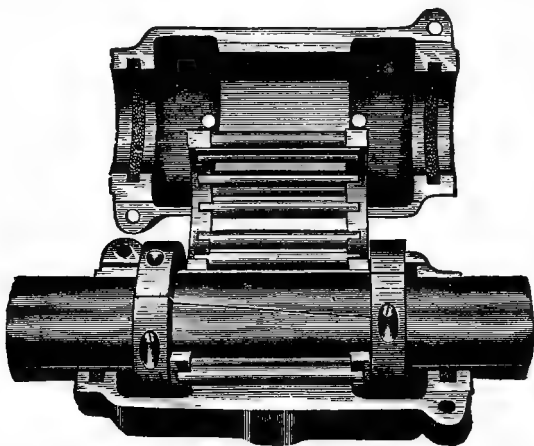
Sells Roller Bearing Shaft Box Fits Standard Hangers.
